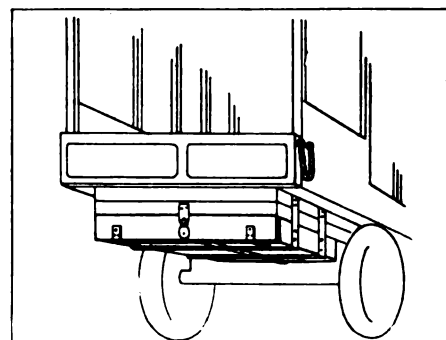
Utilizing Space Under Truck for Attachment of Convenient Tool Box.
